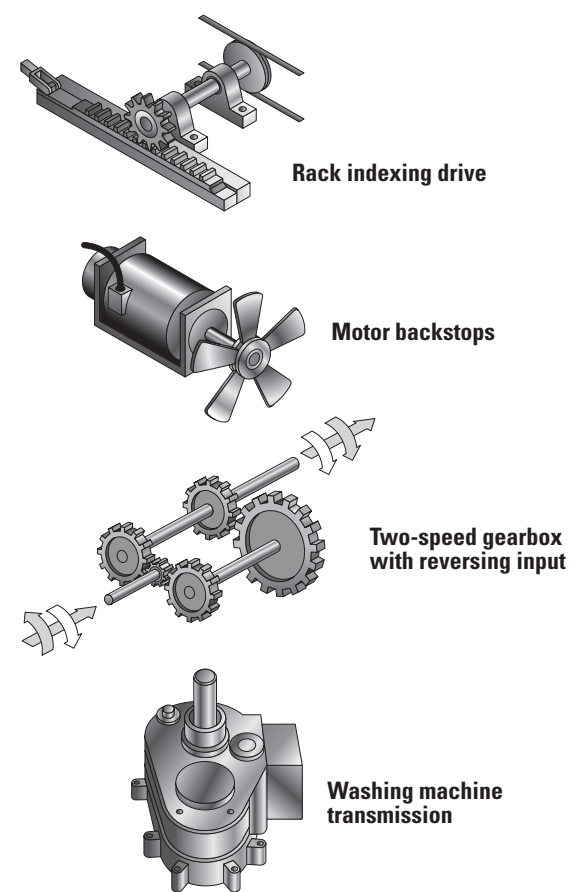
(2). Drawn cup clutches and clutch and bearing assembly applications
